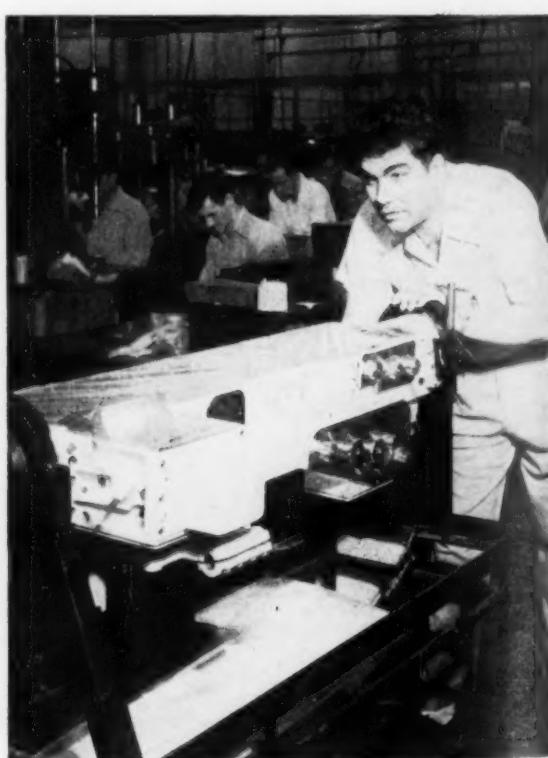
This special roller mounted fixture is used to assemble the mechanical components of the range finder.
